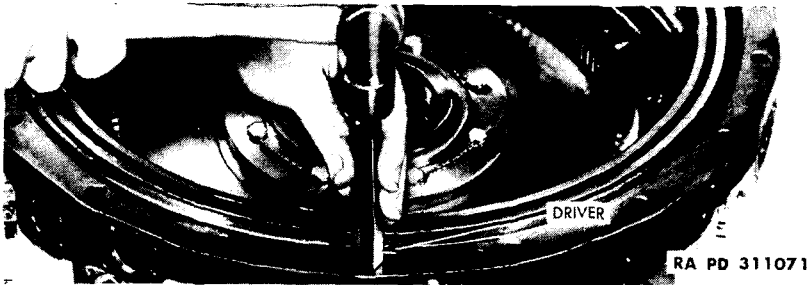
Installing Fuel Pump Sleeve, Using Driver 5A2171
